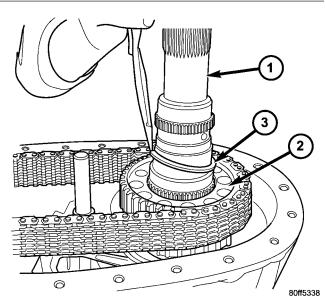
Install Rear Output Shaft Sprocket Retaining Ring
